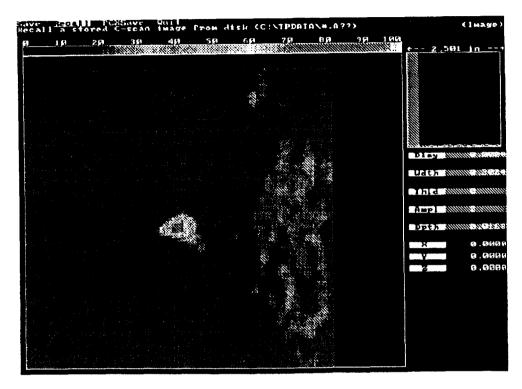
A. Focused UT image of weld defect detected in a weldment.
